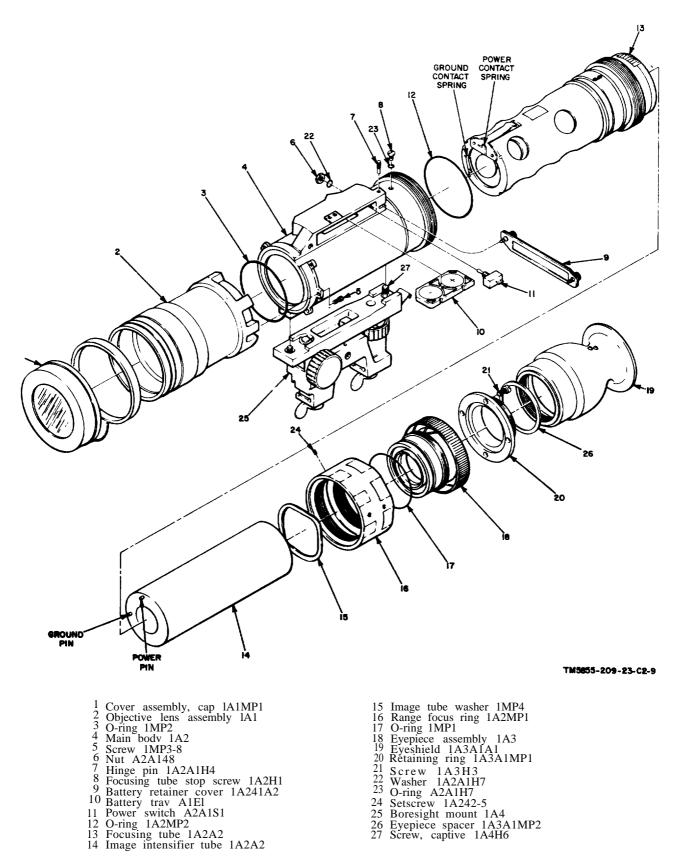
Night sight, exploded view (AN/PVS-3A).
